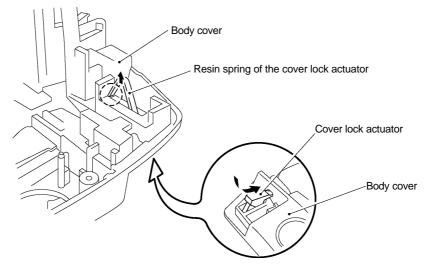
Reassembly of the Cover Lock Actuator
